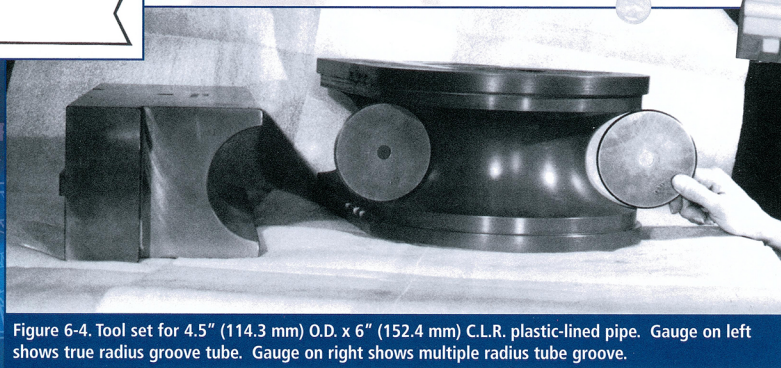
Tool set for 4.5" (114.3 mm) O.D. x 6" (152.4 mm) C.L.R. plastic-lined pipe. Gauge on left shows true radius groove tube. Gauge on right shows multiple radius tube groove.
